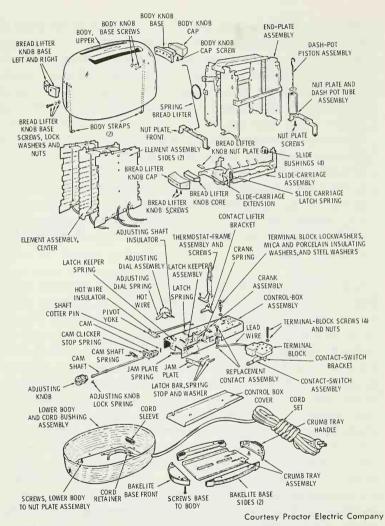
The disassembled view of a modern automatic pop-up toaster.
